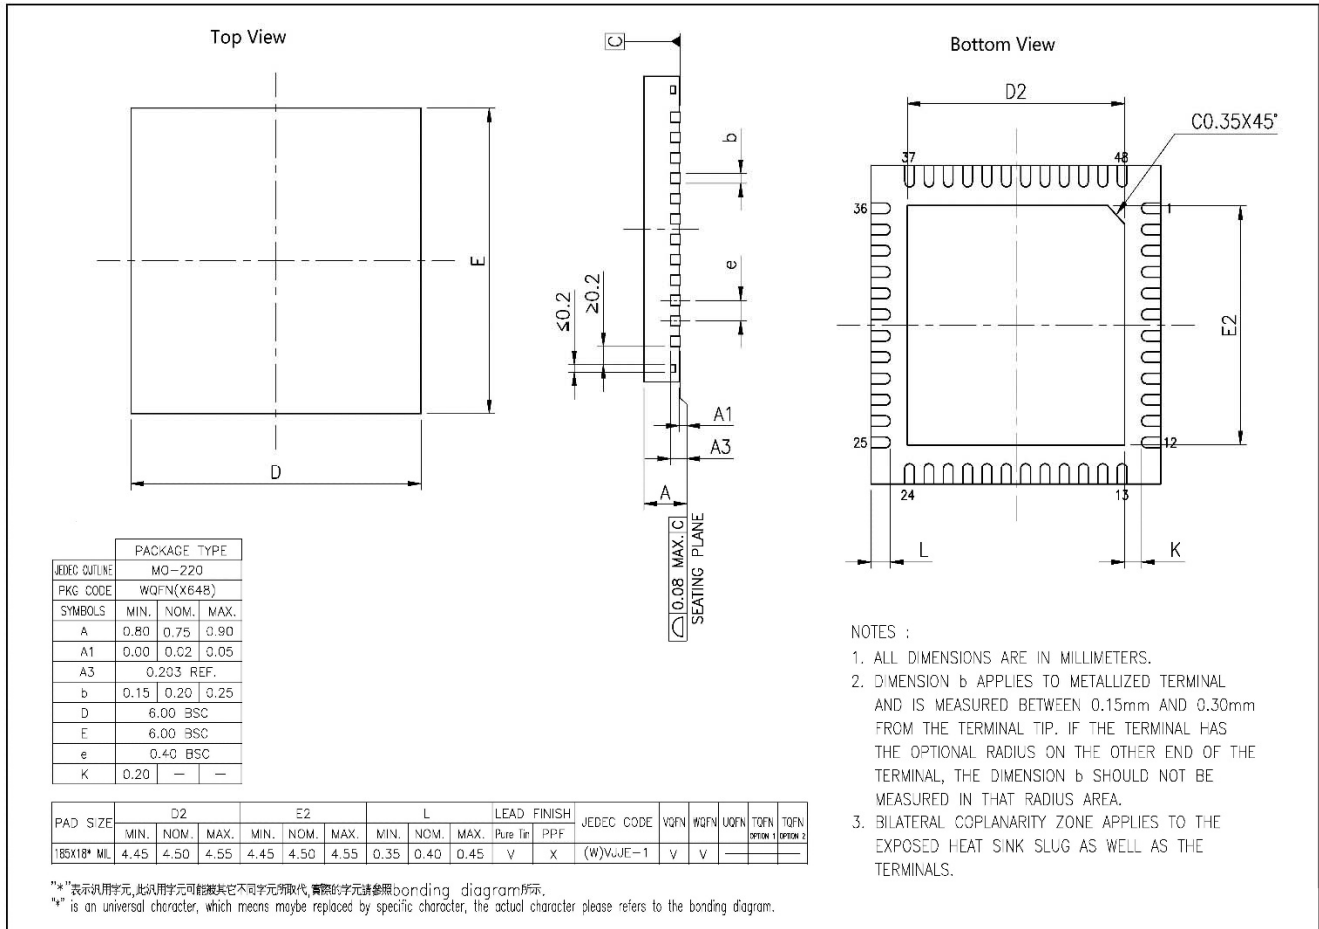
LT8911EXB QFN48 6mm x 6mm Package
